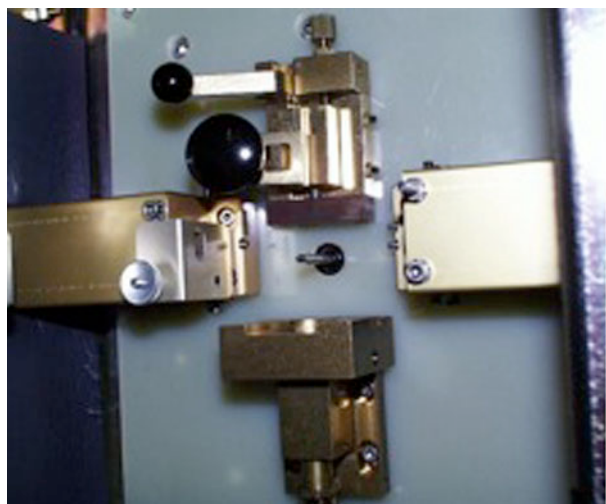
, "L" Bracket Installed Covering Lens Assembly
